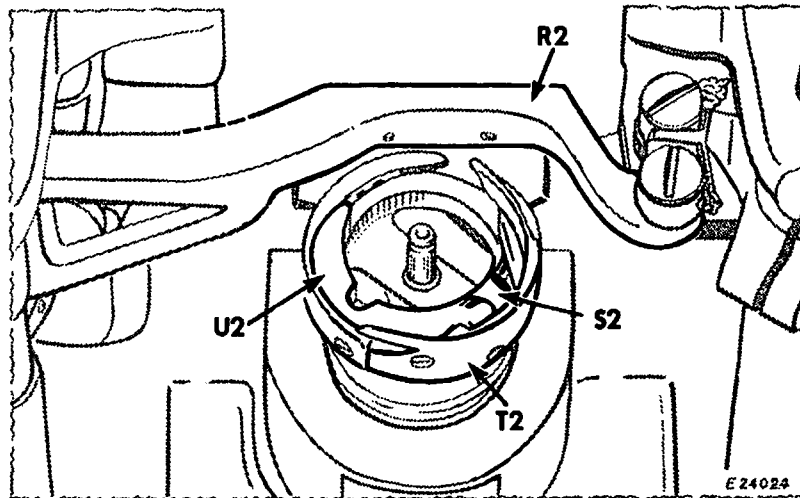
Showing Correct Position of Thread Guard T2 and Bobbin Case Holder U2 for Removal of Sewing Hook
